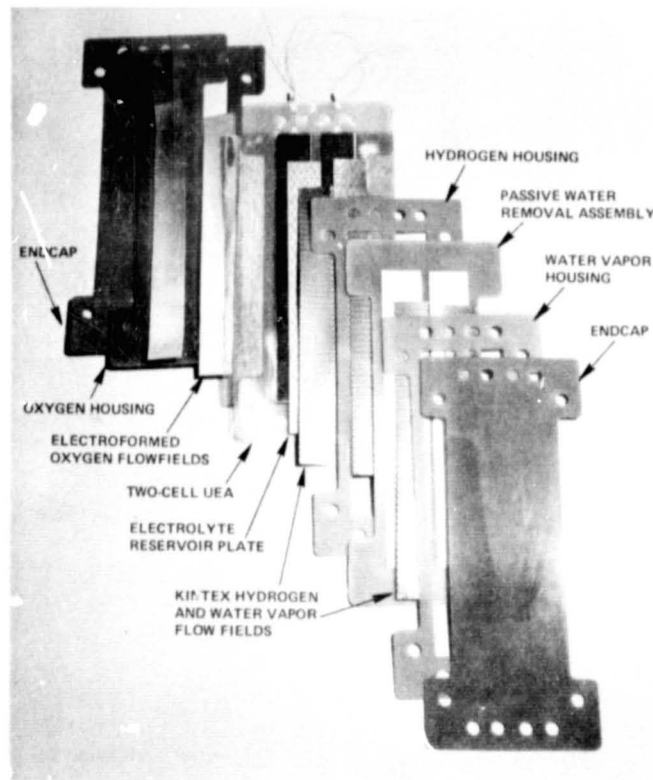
Components of a Two-Cell Plaque Assembly (WCN-3664)
